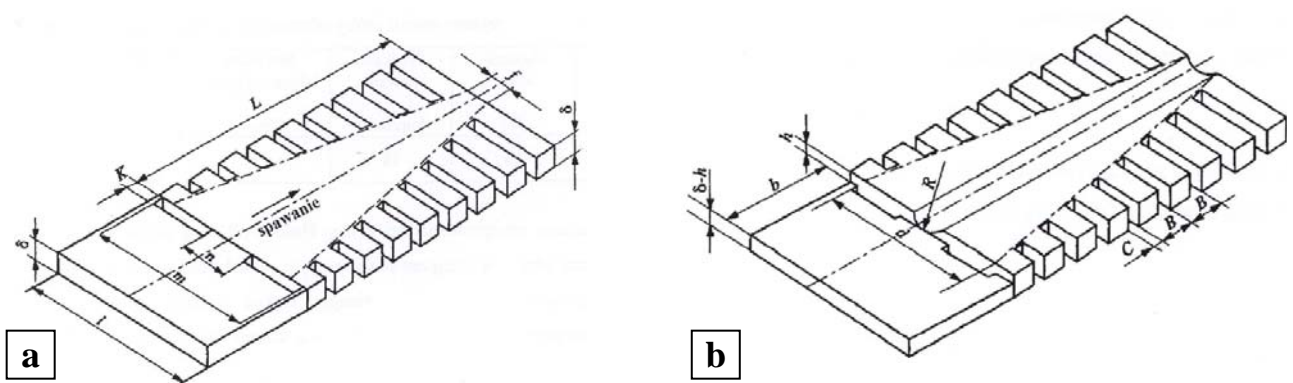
Houldcroft test plates: a) welding without filler, b) welding with filler [17]
